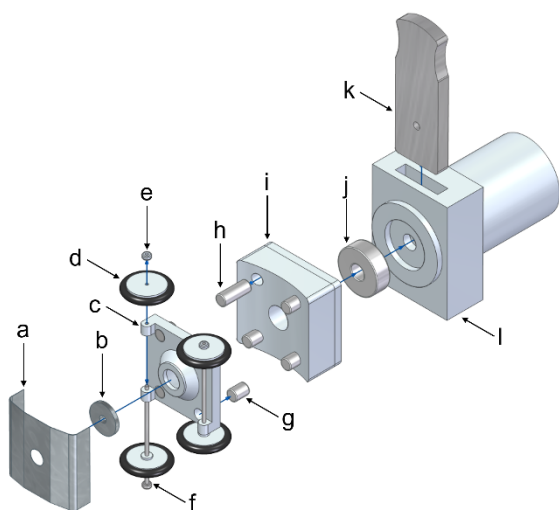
An exploded view of the internal collimator and external clamp assemblies. Annotated are: (a) Lead shielding for cart; (b) lead 3 mm pinhole; (c) 3D printed cart chassis; (d) 3D printed rim with nitrile O-ring tires to give a 12 mm diameter wheel; (e) plastic hubcap; (f) stainless steel axle; (g) 3 mm diameter, 4 mm N42 neodymium magnets; (h) 3 mm diameter, 13 mm N42 neodymium magnets; (i) 3D printed magnetic clamp body; (j) 12 mm OD, 4 mm ID, N42 neodymium ring magnet that is glued to magnetic clamp body; (k) mild steel locking bar; (l) fixed clamp that attaches to the main collimator.
